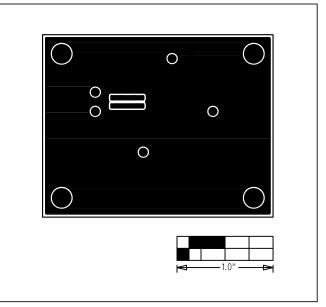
MAX9945 EV Kit PCB Layout—Solder Side
